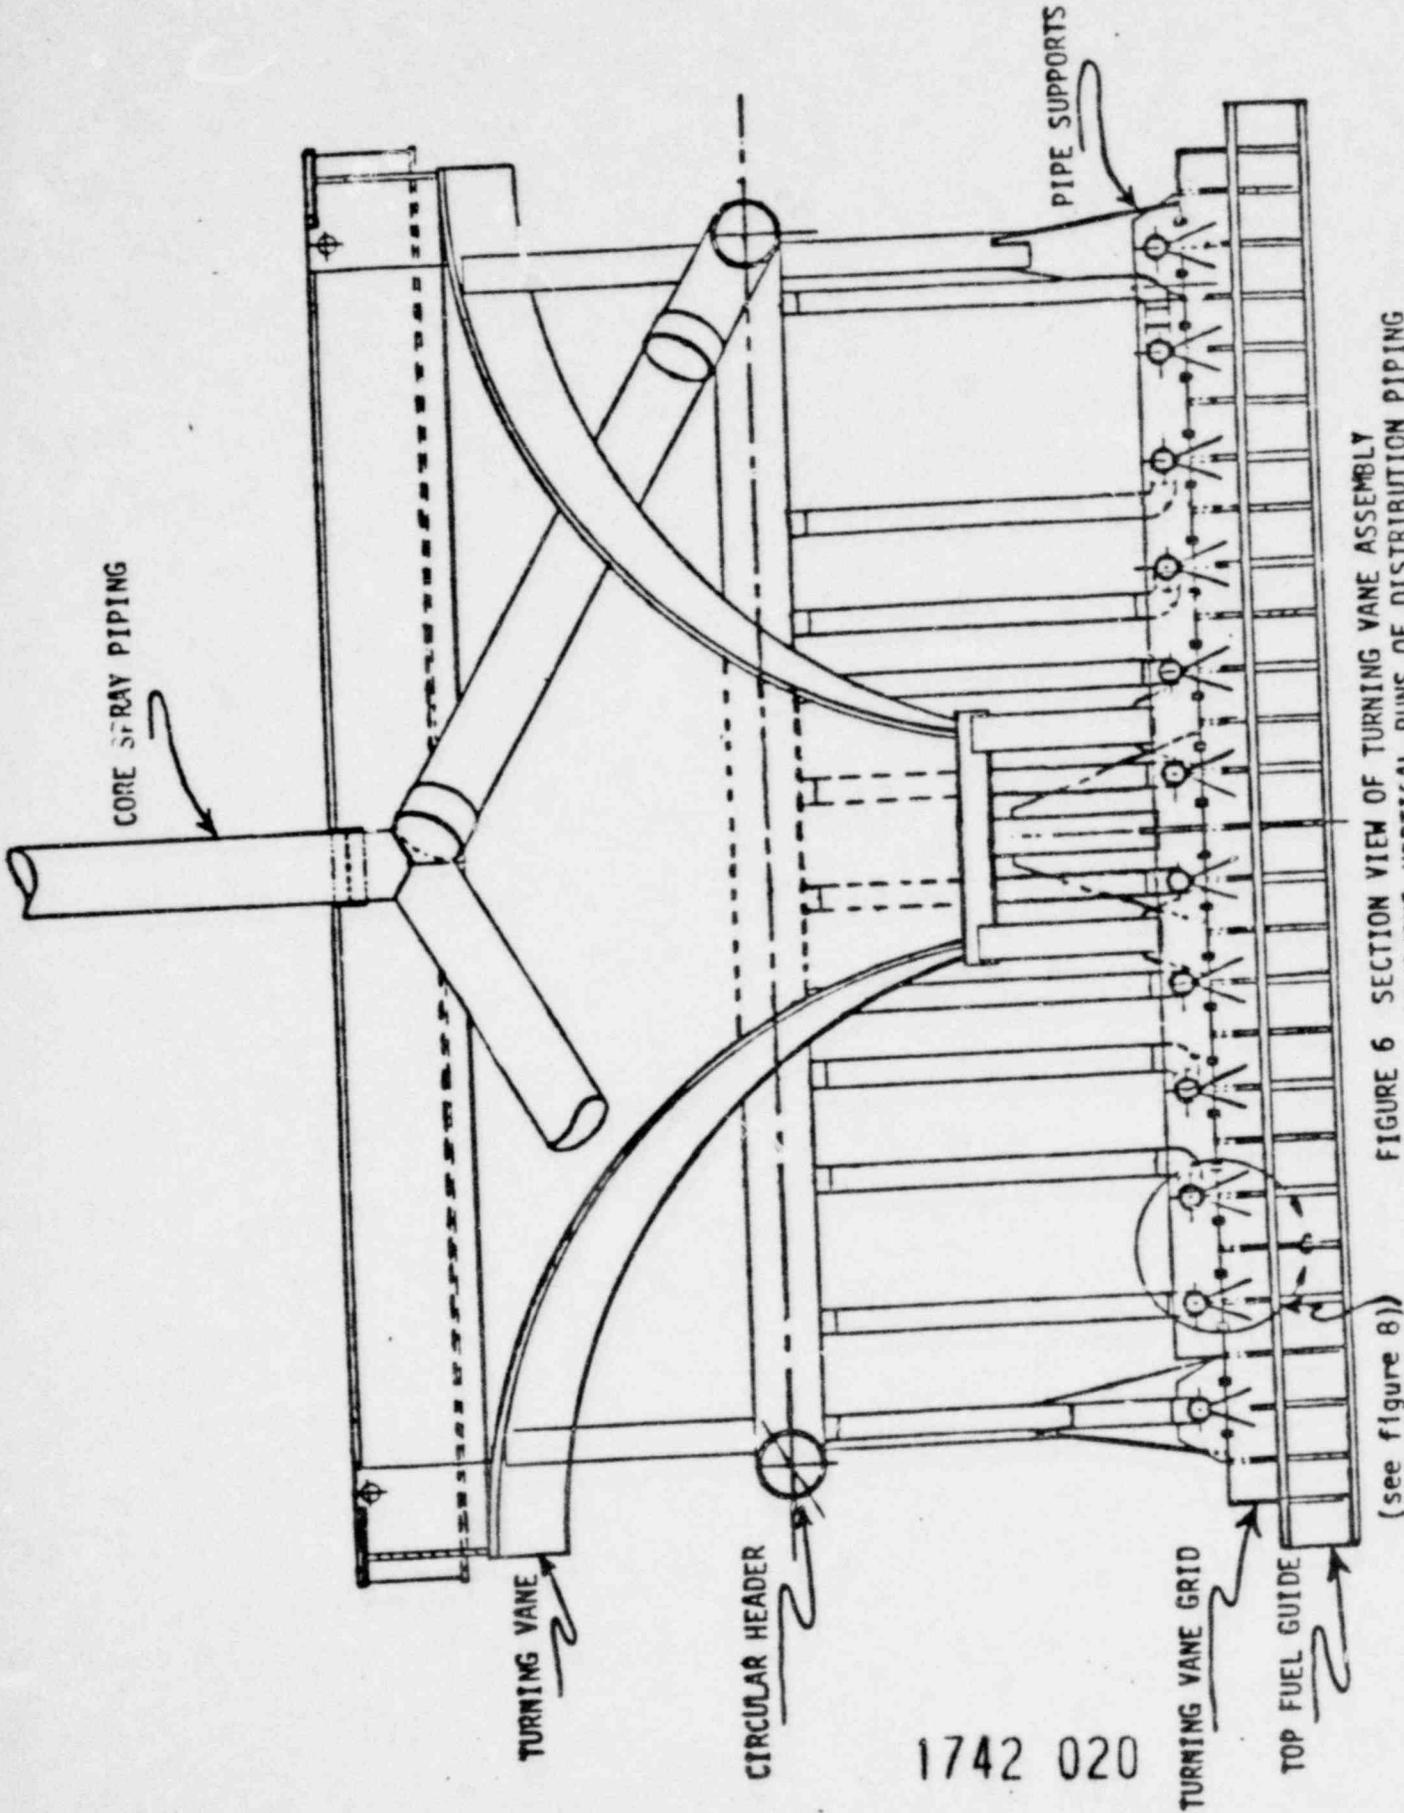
SECTION VIEW OF TURNING VANE ASSEMBLY
